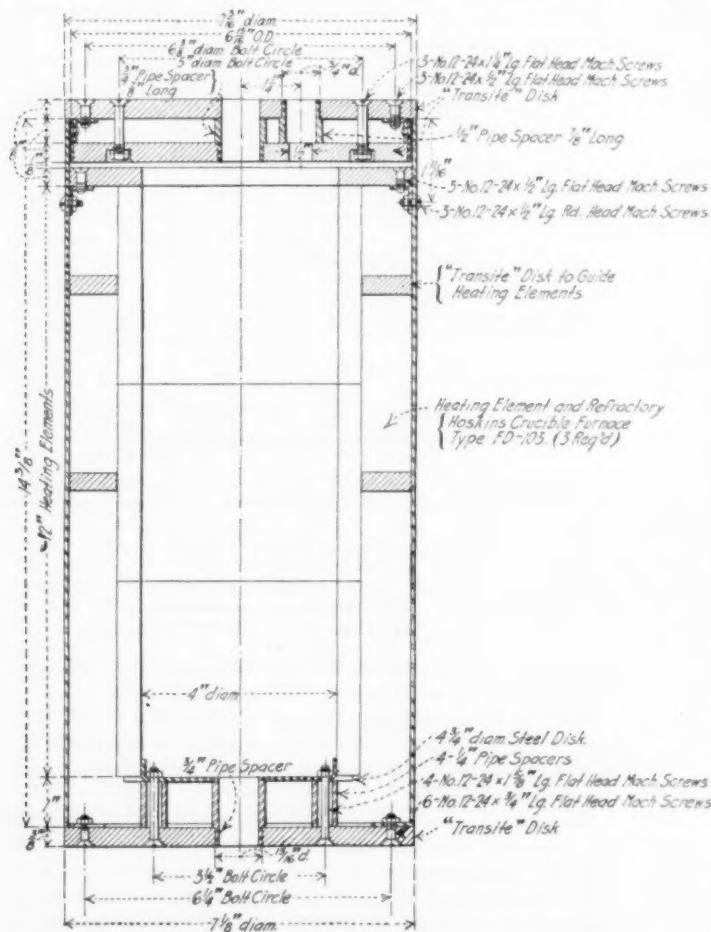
DRAWING SHOWING PRINCIPAL CHANGES TO MAIN FURNACE AFTER TEST 12
